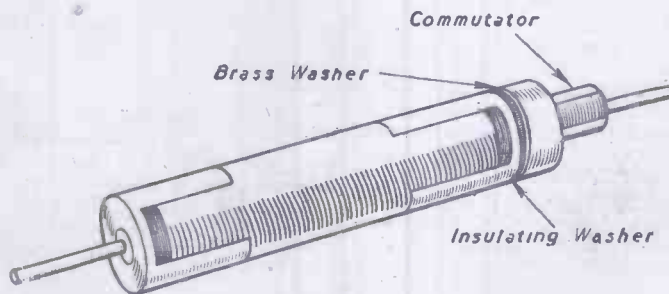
The completed armature, showing the insulating washer and commutator in position.
